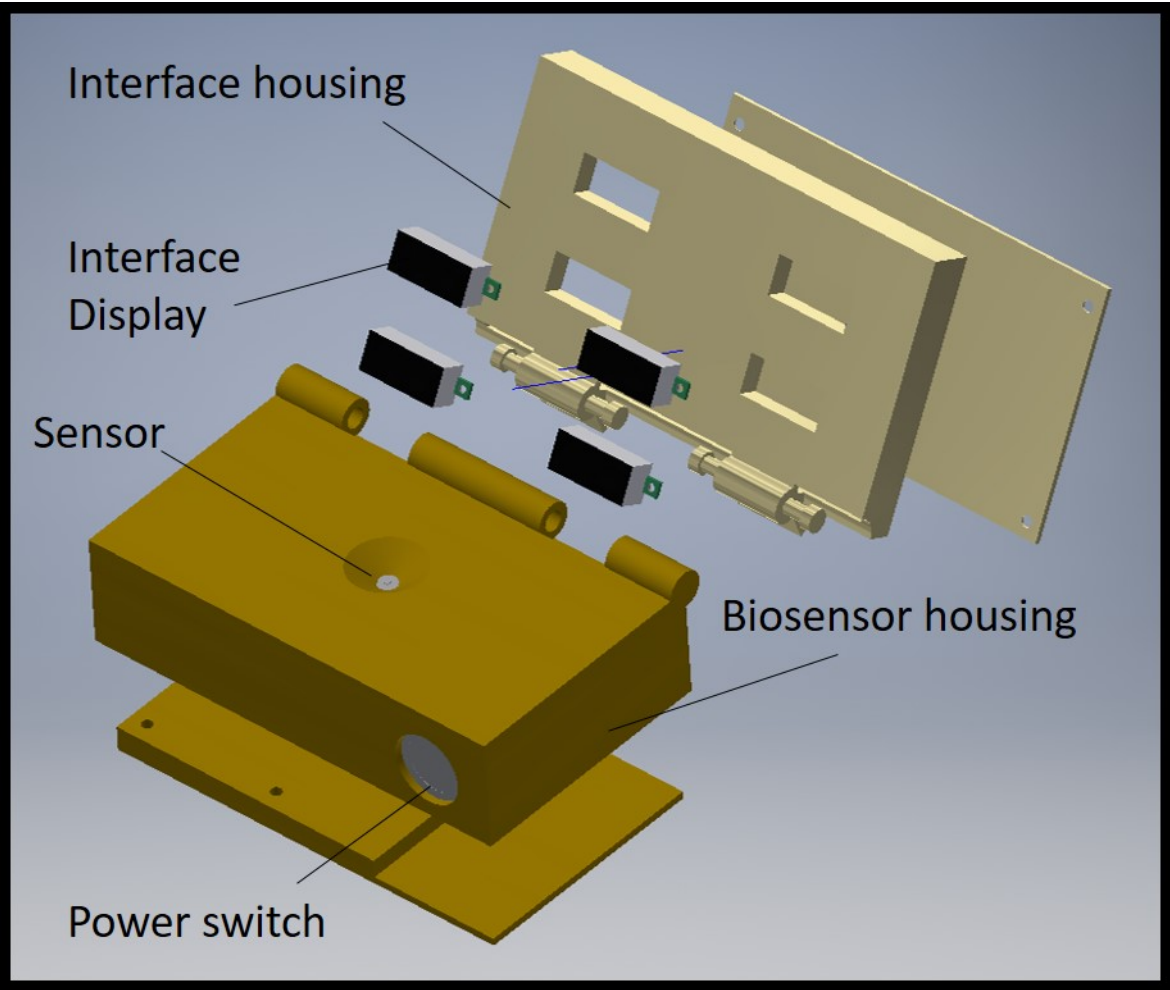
Expanded view of the laptop-shaped foldable packaging illustrated in Fig. 3.10.
